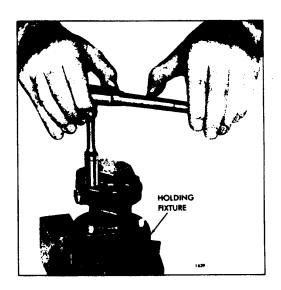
Removing Fuel Pump Cover Using Holding Fixture J 1508-10
